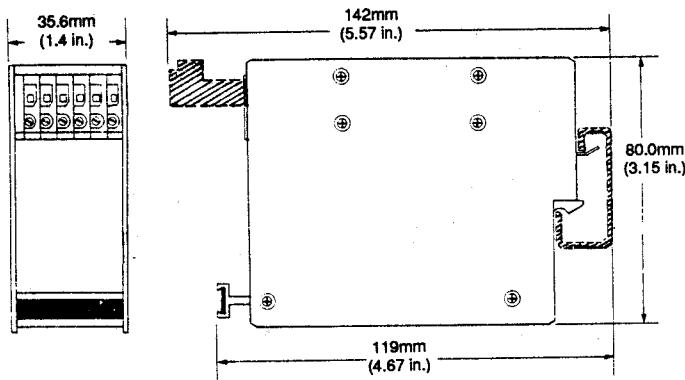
Dimensions for the EP-FDX Transmitter Unit with DIN Housing.
